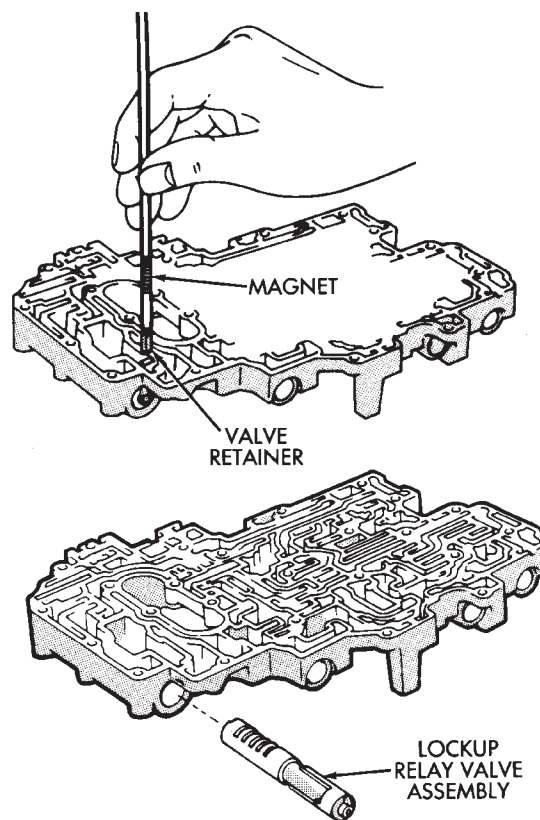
Removing/Installing Converter Clutch Relay Valve
